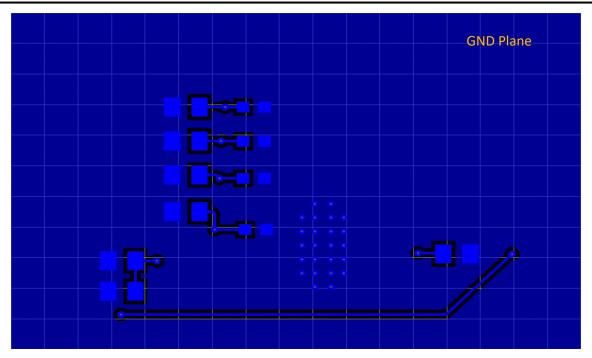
Printed Circuit Board Layout Example: Bottom Layer
